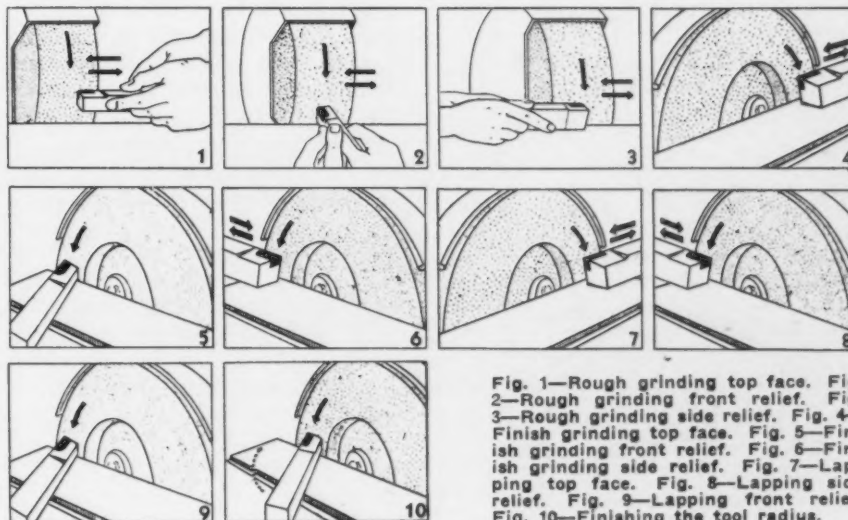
Rough grinding top face. Fig. 2—Rough grinding front relief. Fig. 3—Rough grinding side relief. Fig. 4—Finish grinding top face. Fig. 5—Finish grinding front relief. Fig. 6—Finish grinding side relief. Fig. 7—Lapping top face. Fig. 8—Lapping side relief. Fig. 9—Lapping front relief. Fig. 10—Finishing the tool radius.
